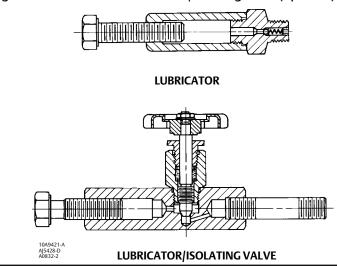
Lubricator and Lubricator/Isolating Valve (optional)
